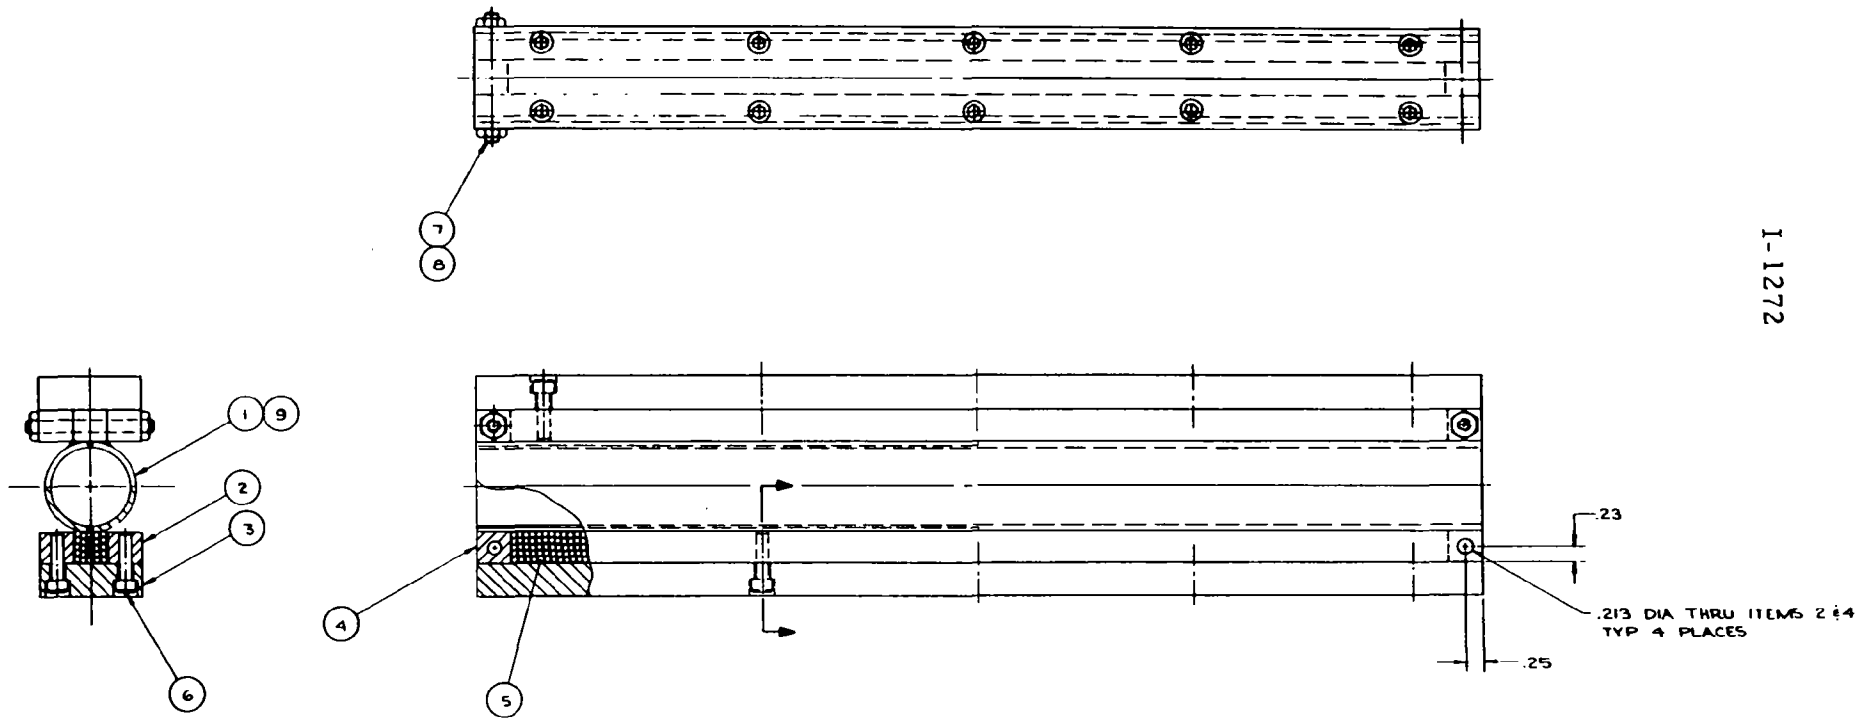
Boiler Matrix Brazing Checkout Module - Side View.
